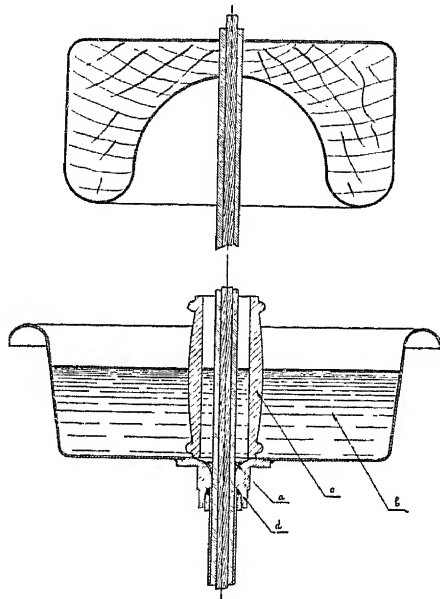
CROSS-SECTION OF CABLE TERMINAL
